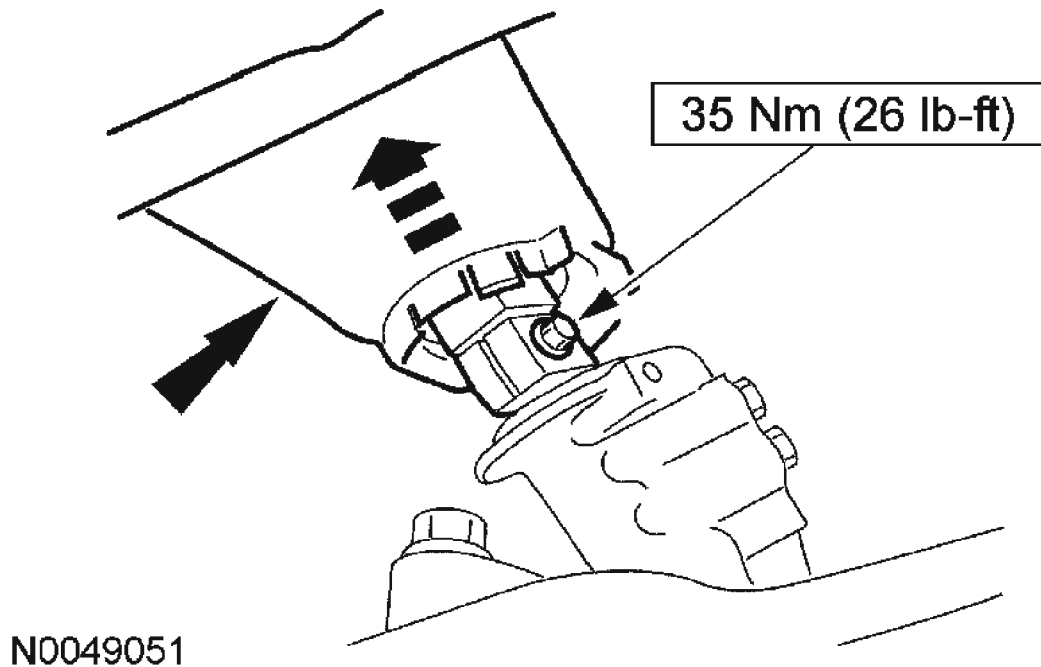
Removing Dash Panel Seal Boot, Steering Column Shaft Bolt And Steering Column Shaft
